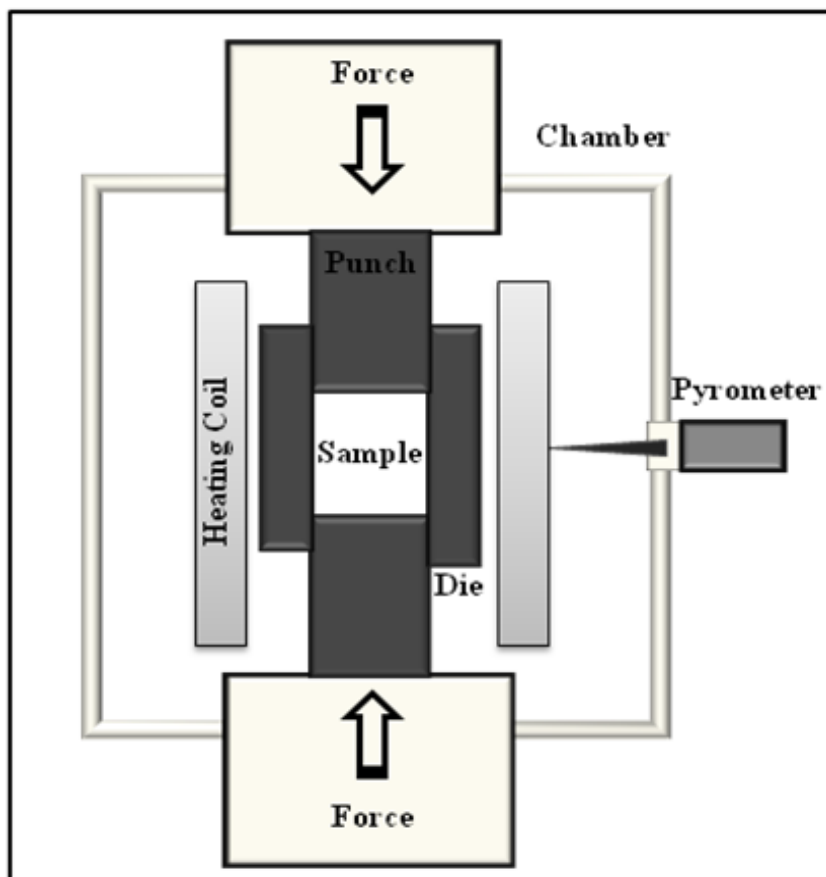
Basic set-up of a hot press in which uniaxial pressure assists in densification of a coil heated sample and monitored by a pyrometer through ports in both coil and die.⁵
